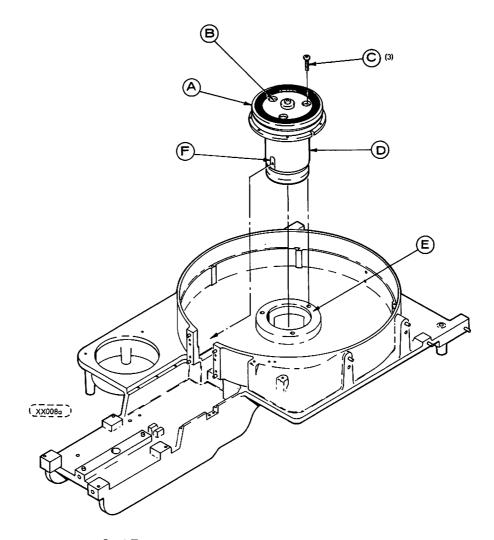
SPINDLE REMOVAL AND REPLACEMENT
